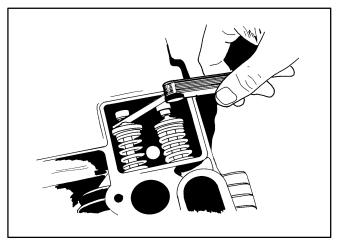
ADJUSTING VALVE CLEARANCE (LASH)
